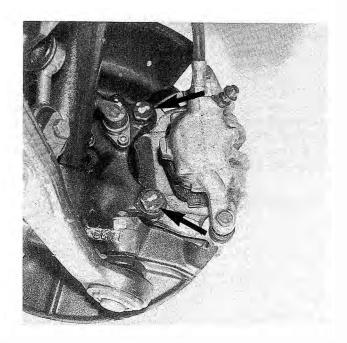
Front brake caliper mounting bolts (arrows).
